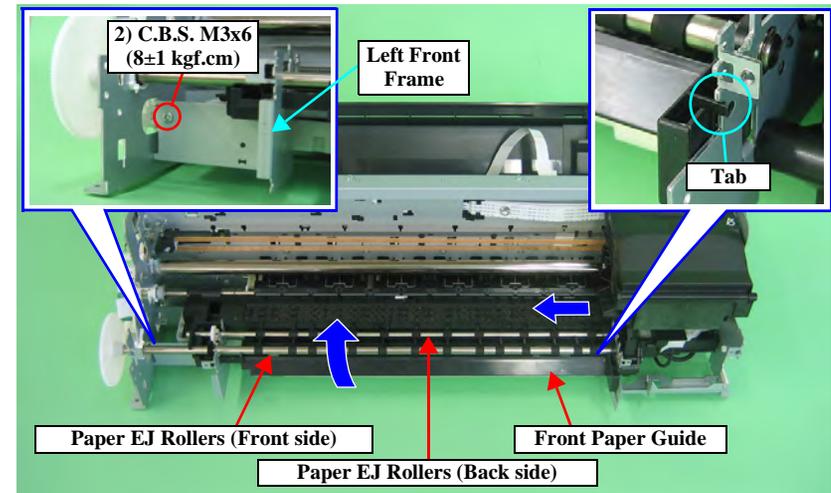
Removing the Front Paper Guide and Paper EJ Rollers
